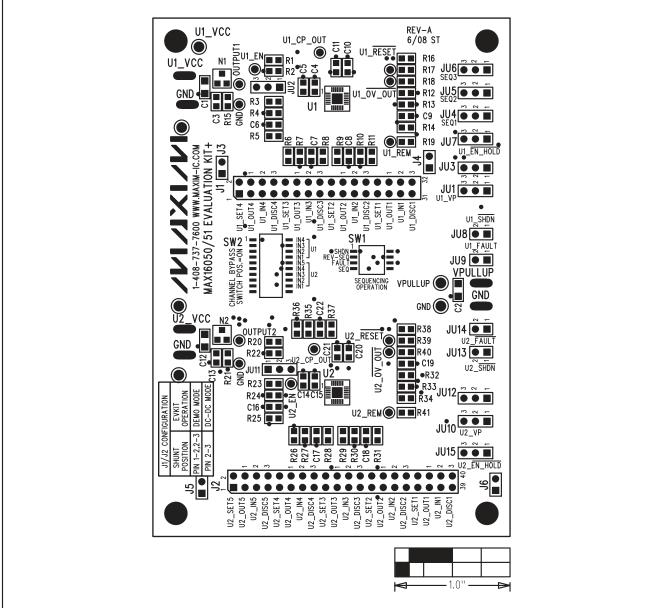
MAX16050 EV Kit Component Placement Guide—Component Side
